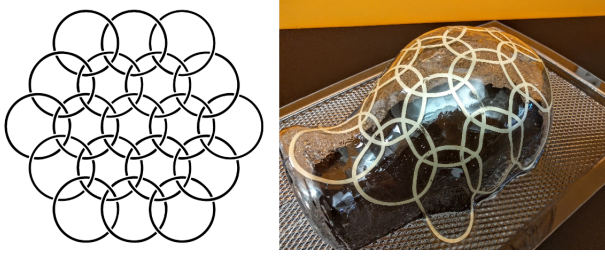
Left: The uniform MRI coil texture, composed of perfectly round circles. Right: Vacuum forming the uniform coil texture to a head shape mold creates distorted oblong coils.
